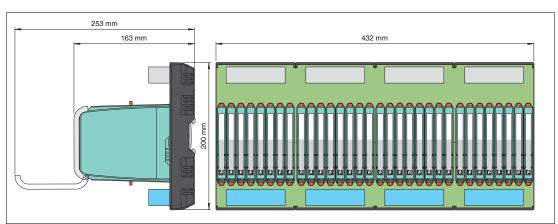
Dimensions (W x H x D): $432 \times 200 \times 163$ mm (17 x 7.9 x 6.42 inch), depth including module assembly
